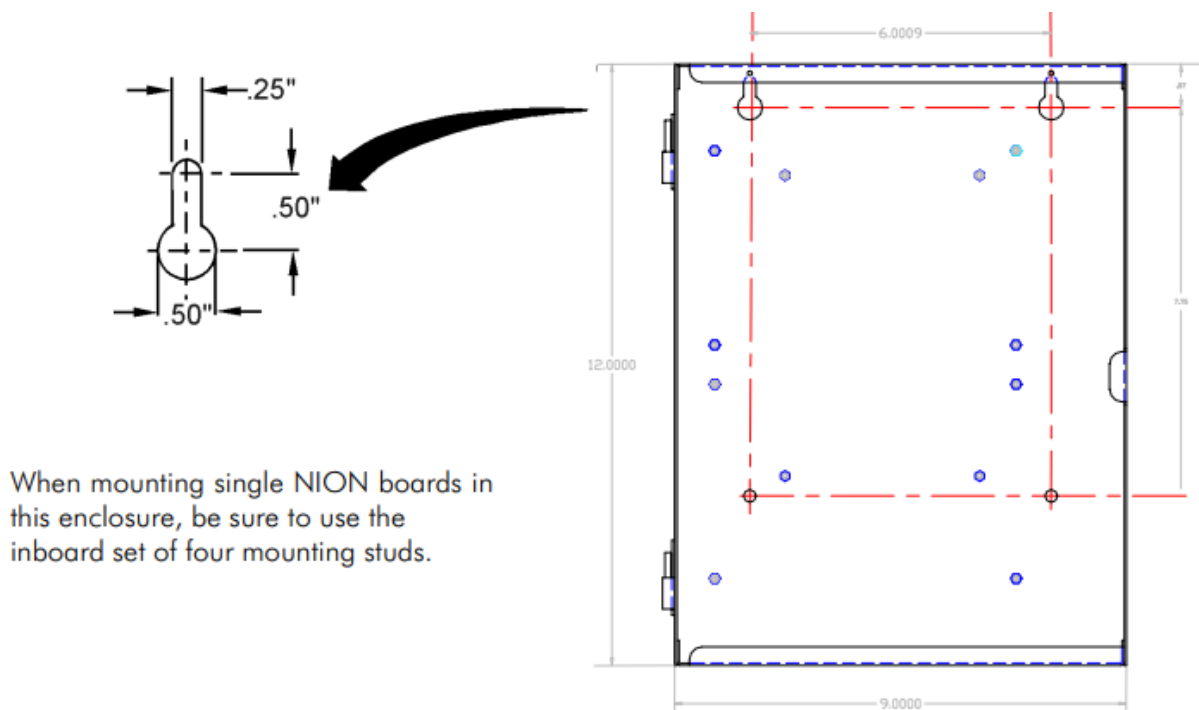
NION Stand-Alone Enclosure Mounting Hole Layout
